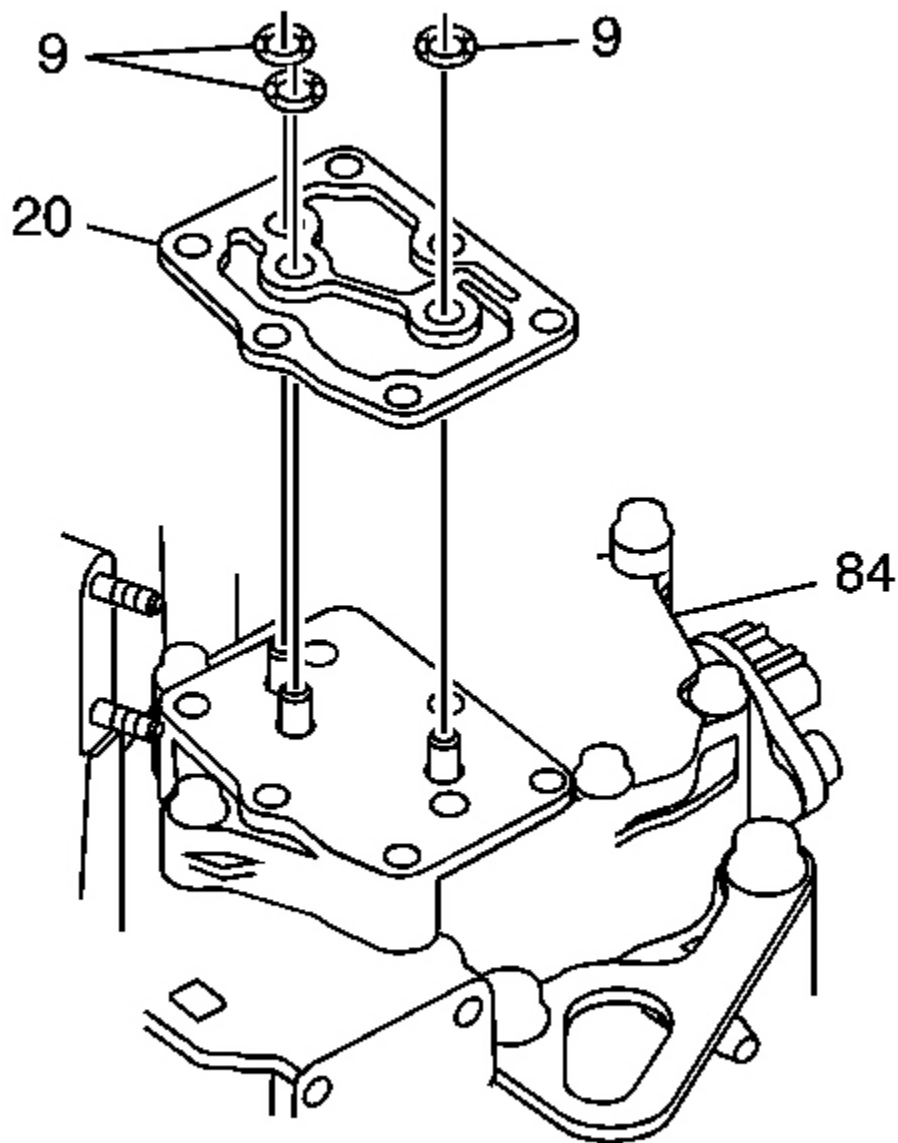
CPC Solenoid Gasket & O-Ring Seals
